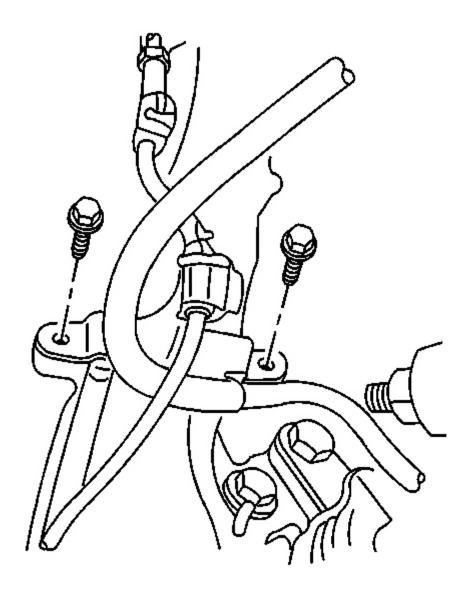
Removing/Installing Brake Hose Bracket Retaining Bolts Courtesy of GENERAL MOTORS CORP.
